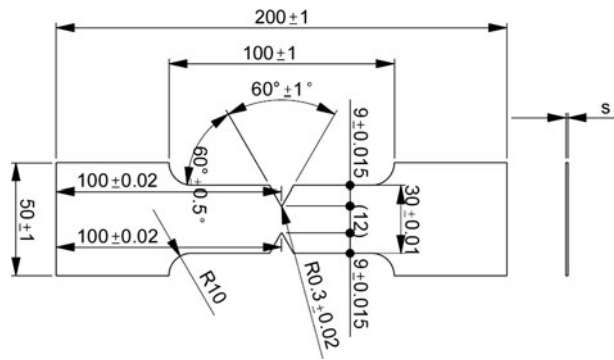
Specimen geometry and dimensions for SSRT tests. The thickness s depends on the steel strip thickness.
